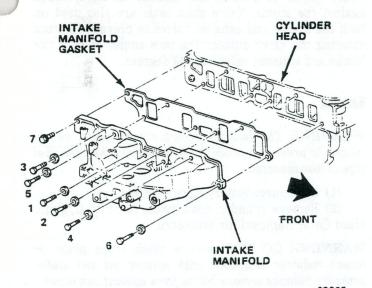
Intake Manifold Bolt Tightening Sequence
